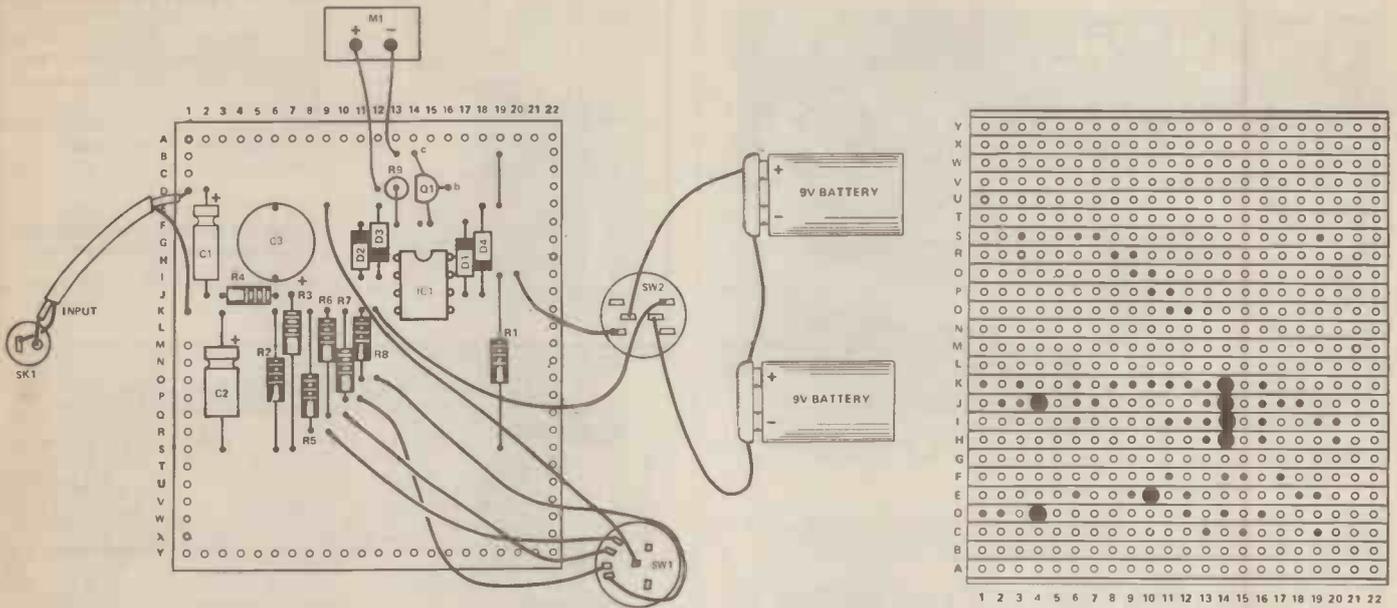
Veroboard layout of the project, showing component positions, track breaks underneath the board and connection details. Make sure you use screened cable for the input lead
